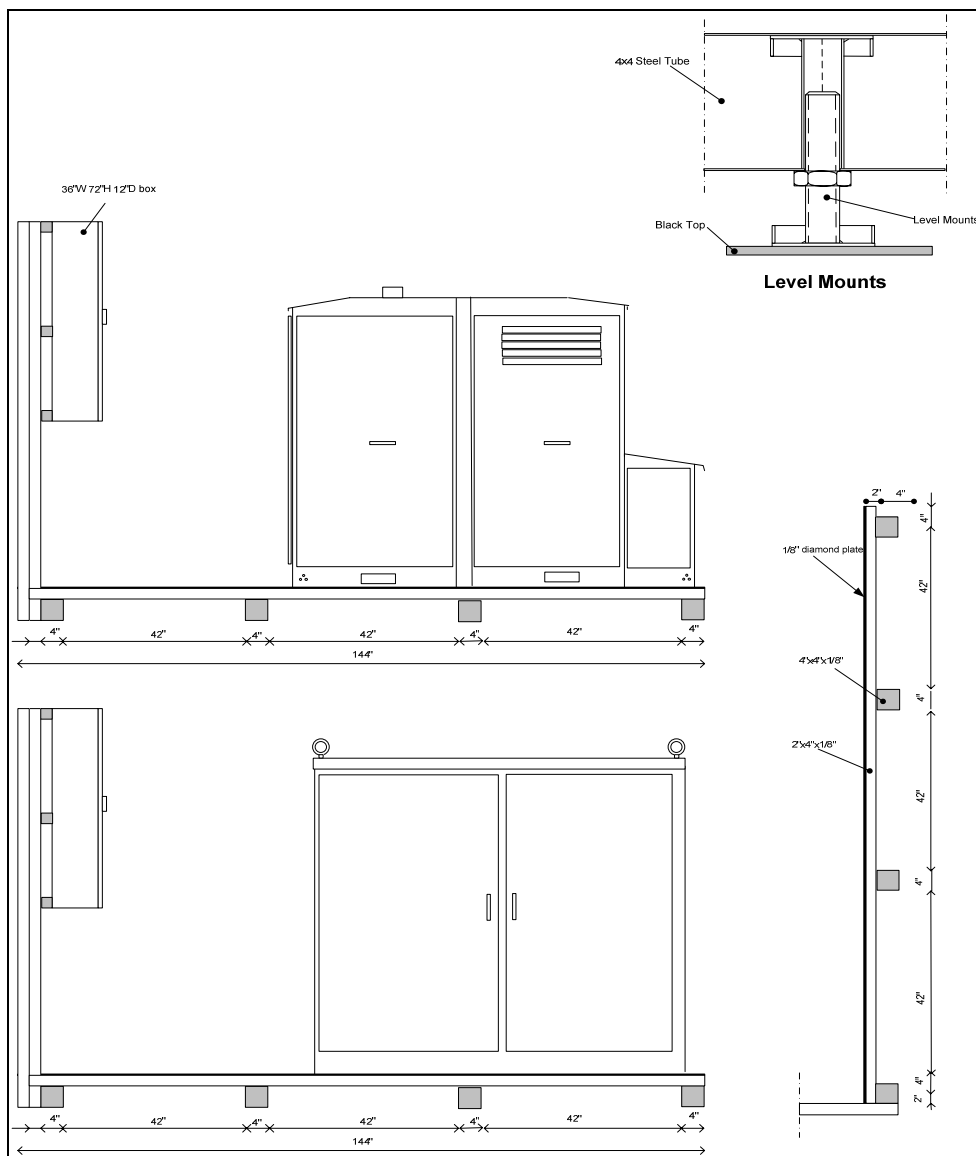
Fuel cell platform mock-up drawings – Plug Power on top, IdaTech on the bottom.
